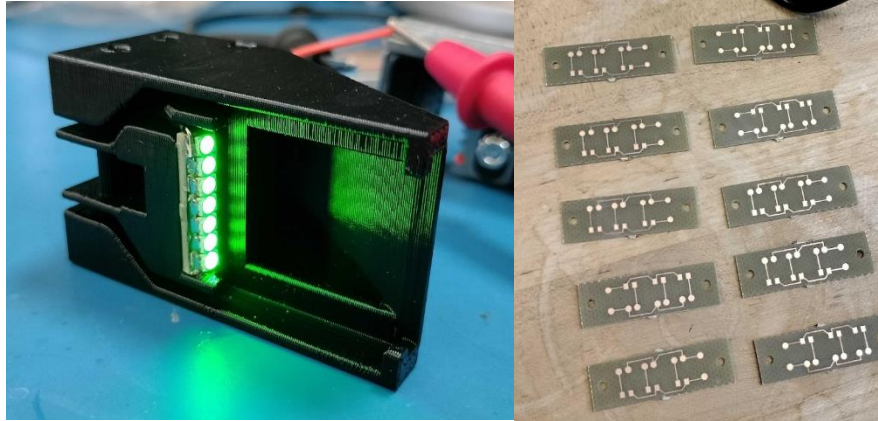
a) (left) Gelsight case with illuminated LED's. b) (right) Gelsight PCB boards.
